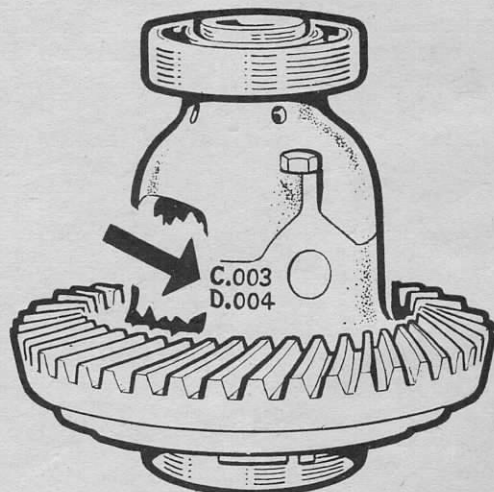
The marking of the differential cage is to indicate its assembly dimensions is clearly shown in this illustration, which bears a "C" dimension of .003 and a "D" dimension of .004.
